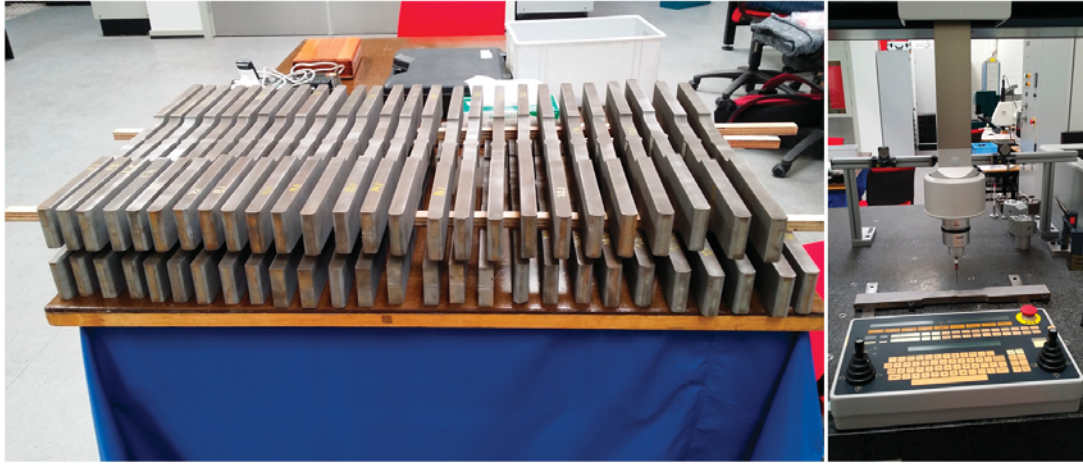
(Left) 20 mm thick butt welded specimens from Batch 2 and (right) Coordinate measurement machine
